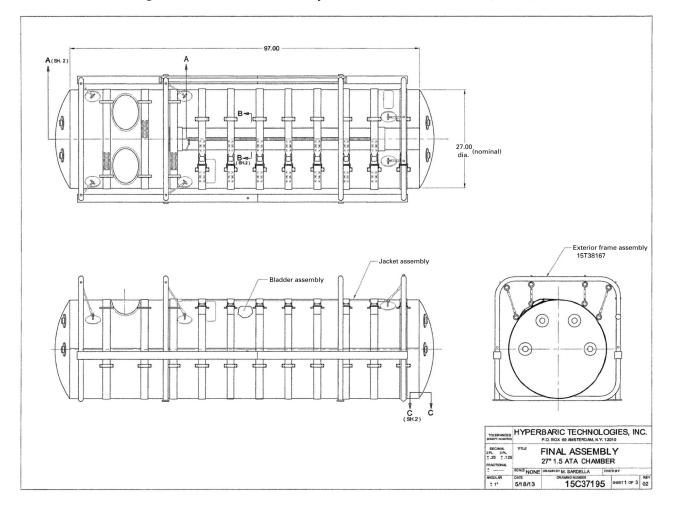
C37195 Final Assembly of 27-in. 1.5 ATA Chamber (Cont'd)
